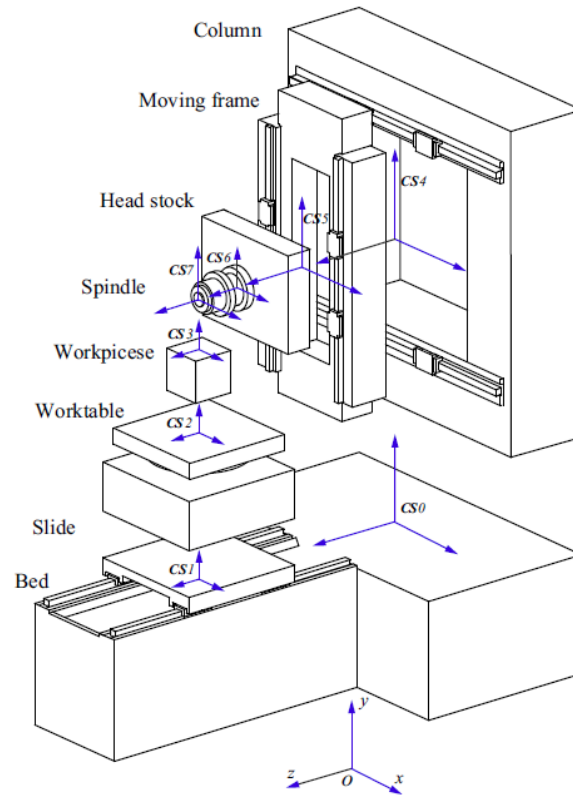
Exploded model of horizontal machine tool and its component [25].
